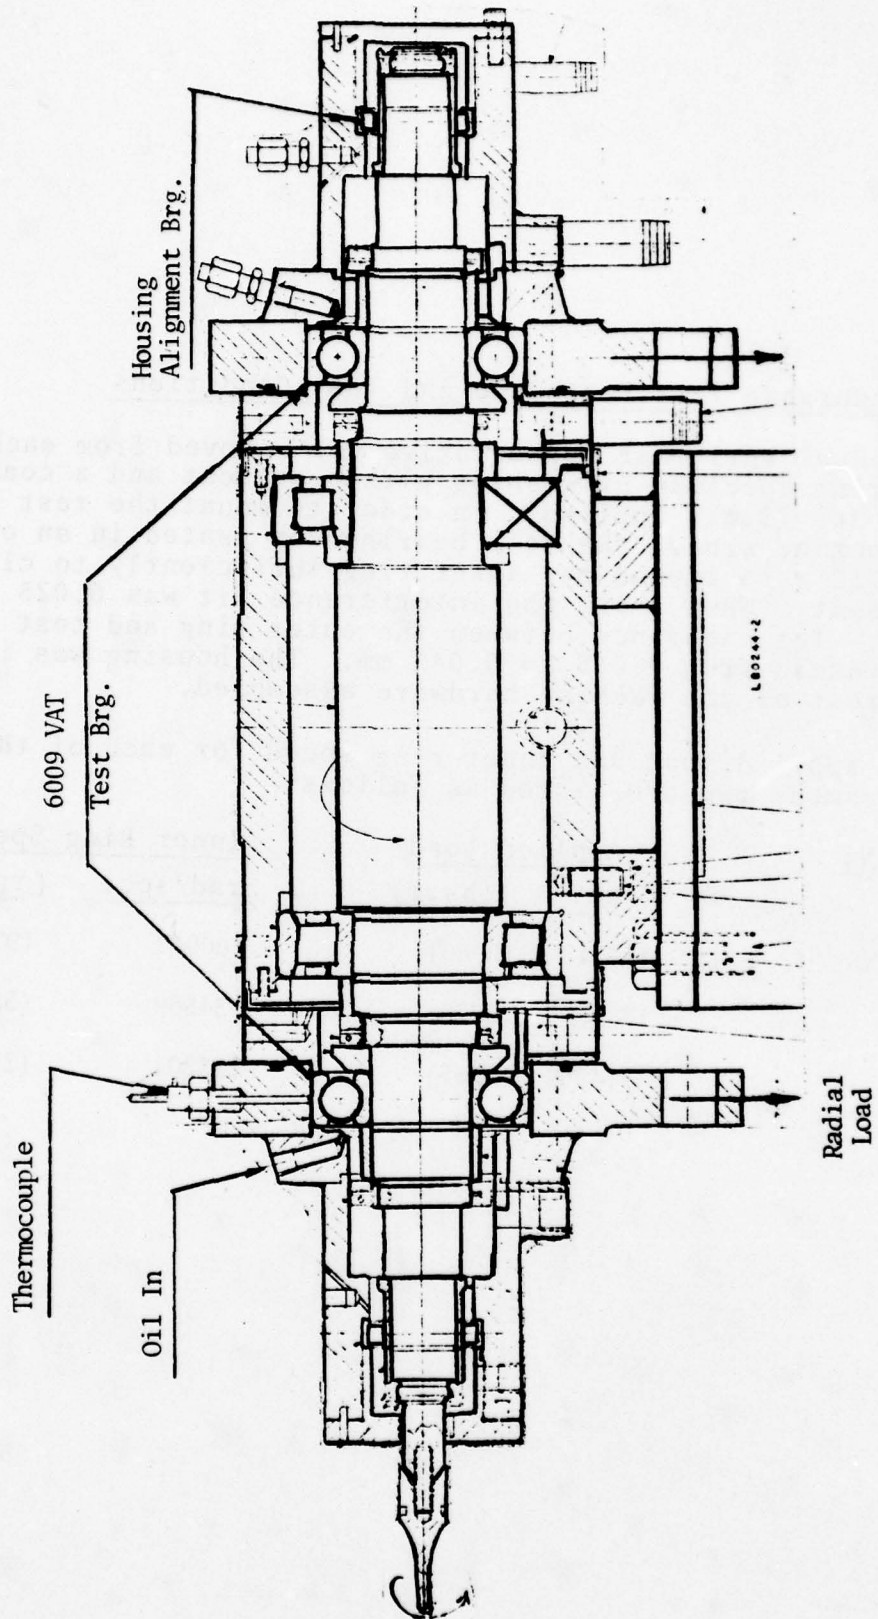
SKF Endurance Test Machine Details of Test Hardware For Deep Groove Ball Bearings
